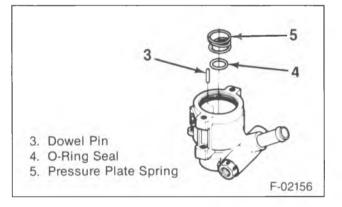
Installation of the Pin, Seal and Pressure Plate Spring
